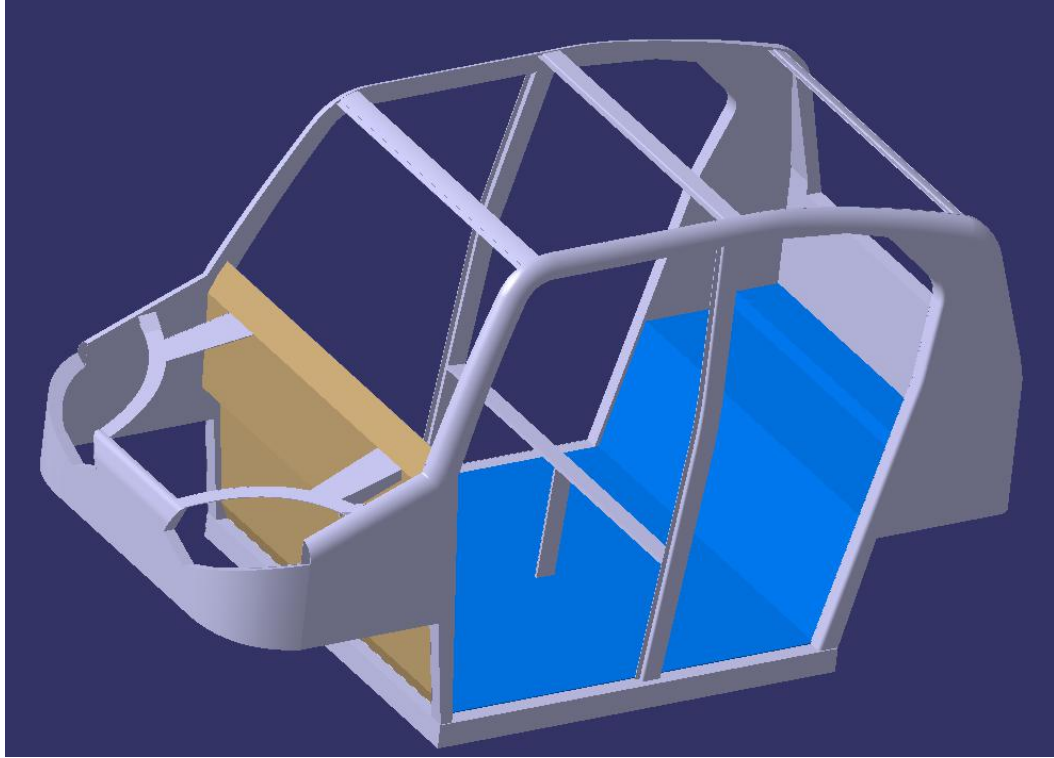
3D CAD Model of the Existing Bajaj Qute
